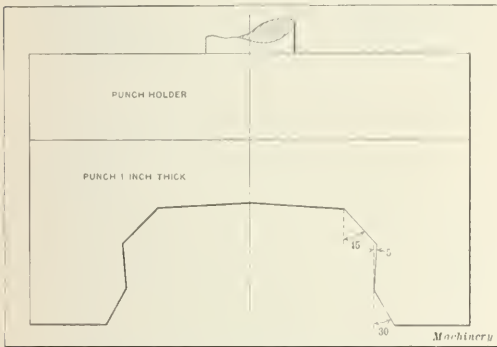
Trimming Punch used in conjunction with Fixture shown in Fig. 7
